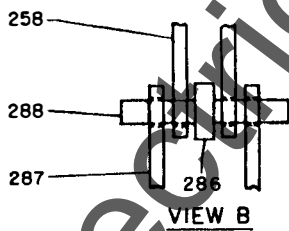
B Complete Spring Assembly (Ref. No. 273)
